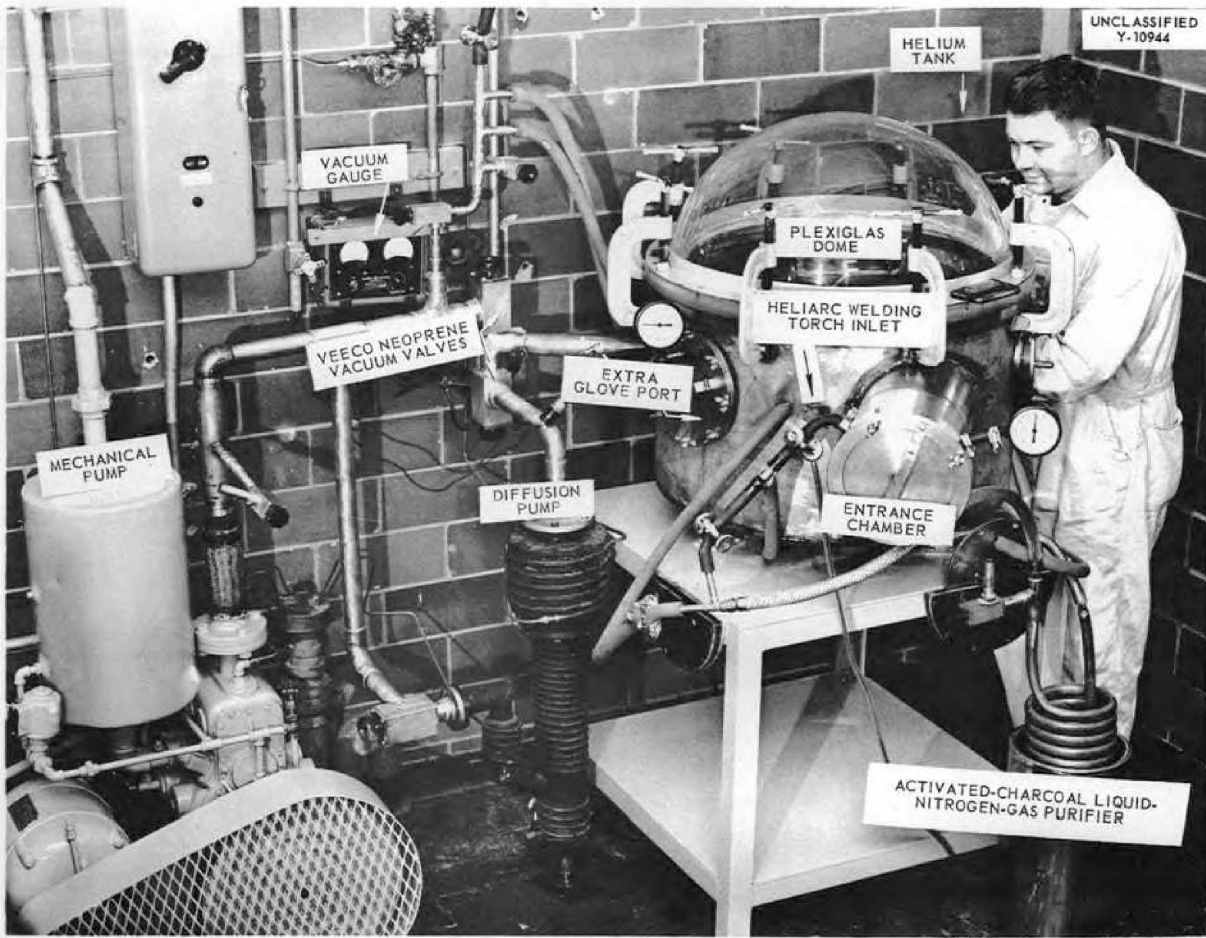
Argon-Atmosphere Dry Box for Welding Niobium.
